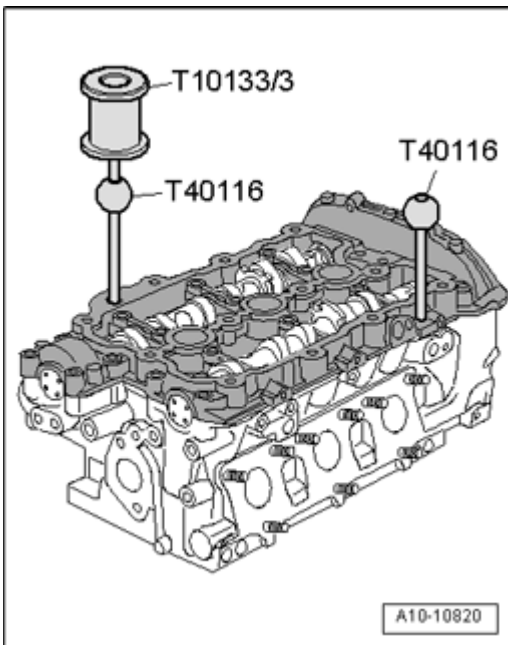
Removing Locating Pins T40116 With Impact Puller T10133/3
